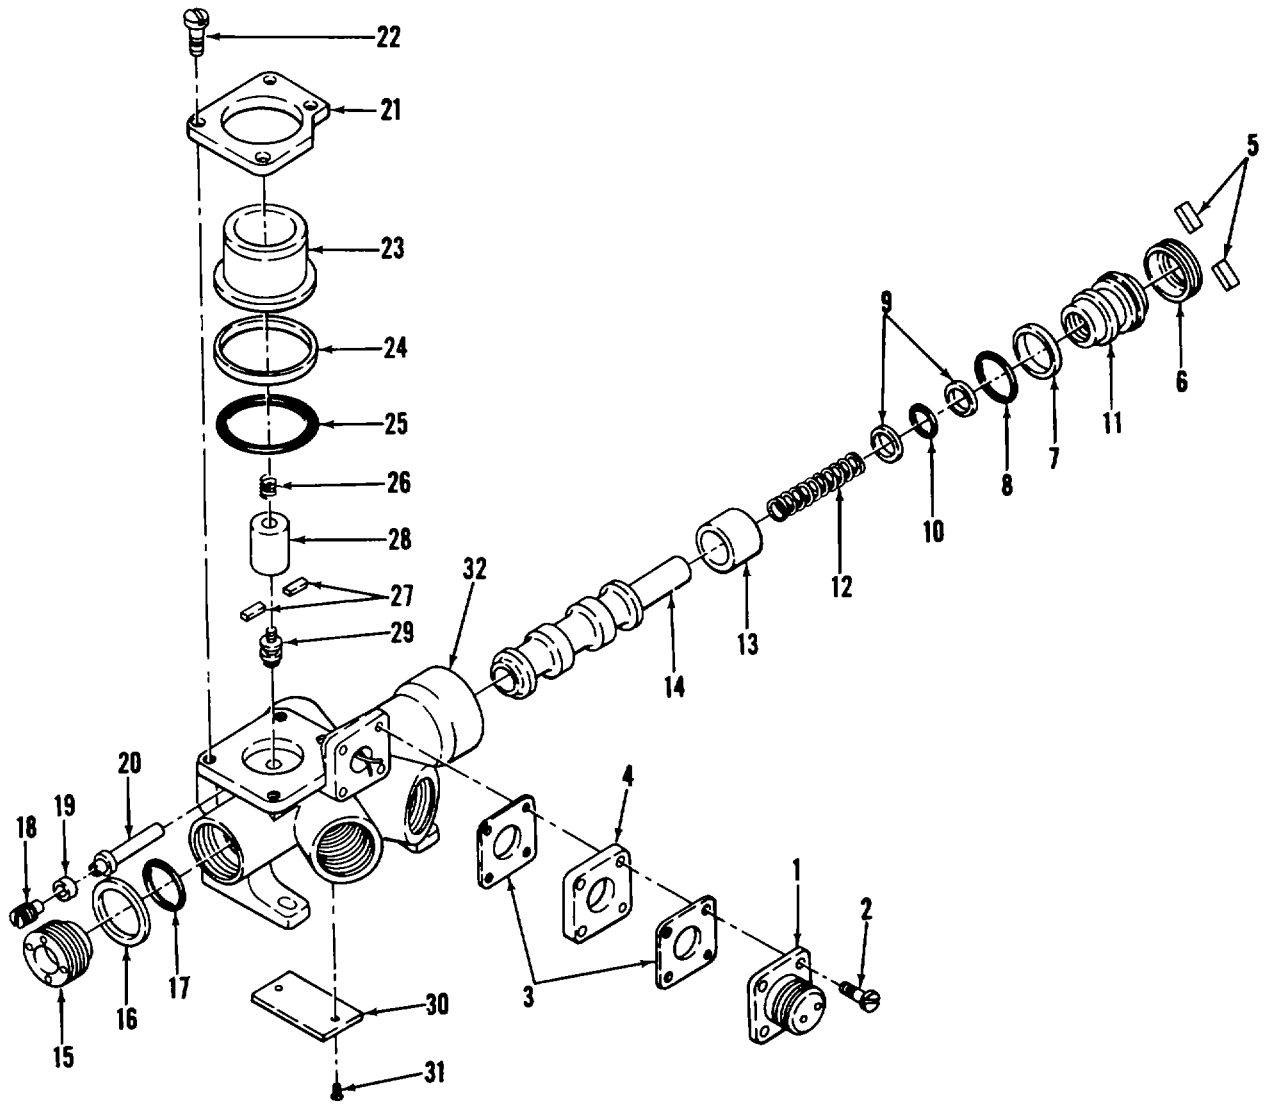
Slide Valve Assembly, Part No. HP796100, Exploded View
